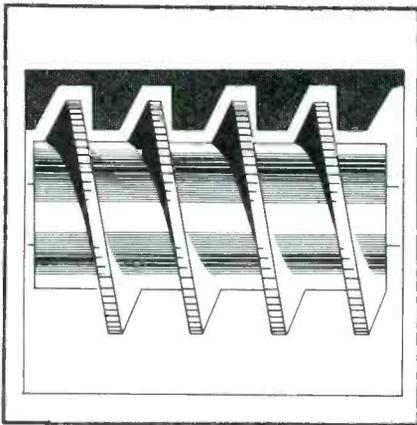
Clearance between gear teeth and adjusting wheel on adjustable wrench.
